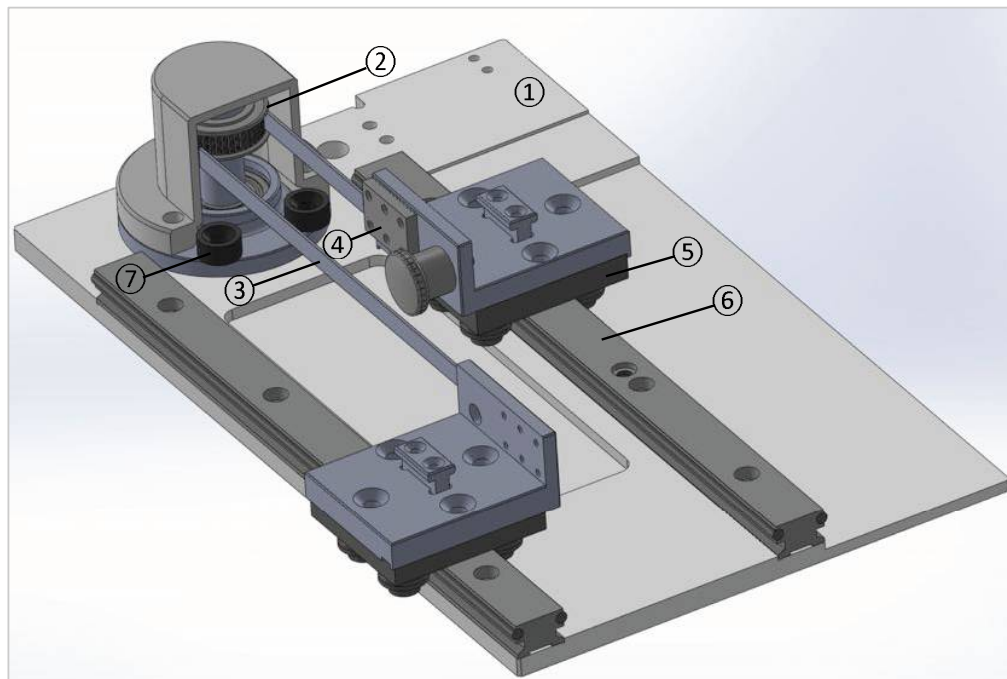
CAD of the End-effector of the mechanical support: 1) Base; 2) Pulley; 3) Belt; 4) Belt clamps; 5) Carriage; 6) Linear guide; 7) Stopper bolt.
